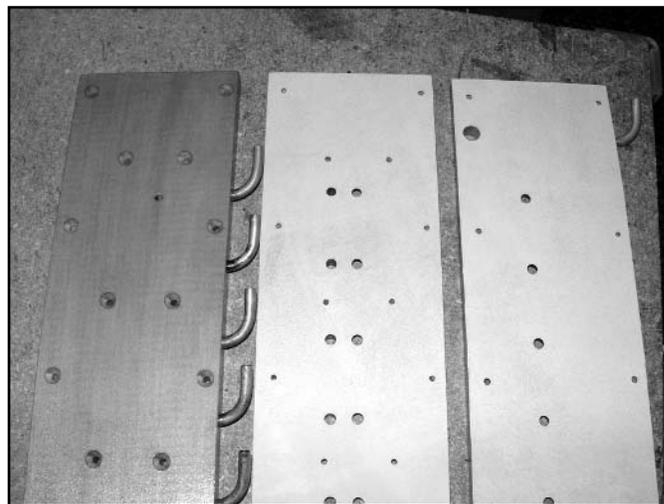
Thick pouch leather used for gaskets on inner two layers.
